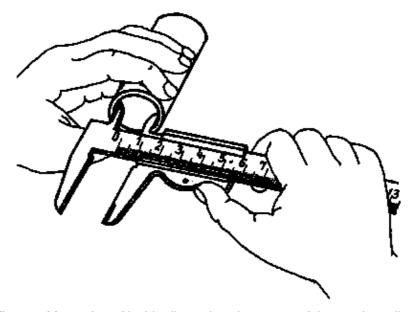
Measuring of inside dimensions by means of the vernier caliper
